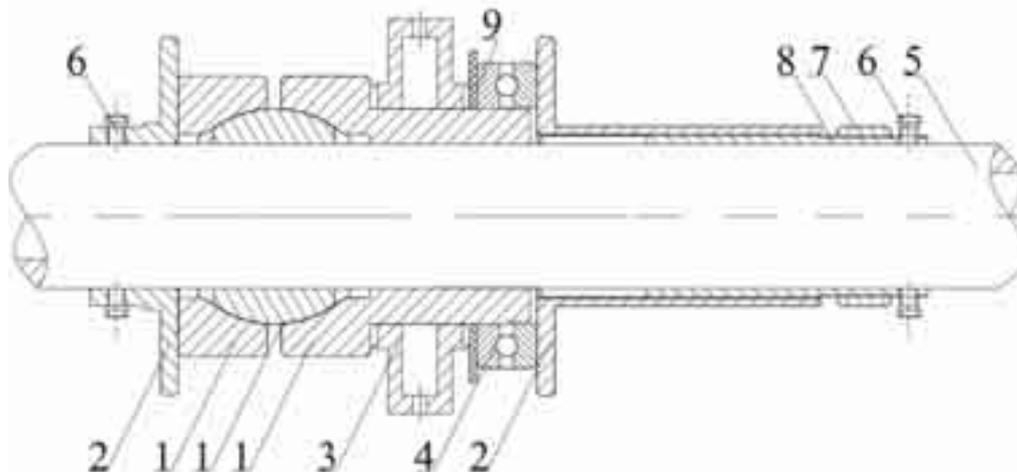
Schematic of frictional damper mounted on glass-making robot's lance: 1 – damper's spherical frictional rings, 2 – preload rings, 3 – force gauge, 4 – thrust ball bearing, 5 – lance, 6 – rings locking bolts, 7 – nut, 8 – preload bolt, 9 – flexible spacer
